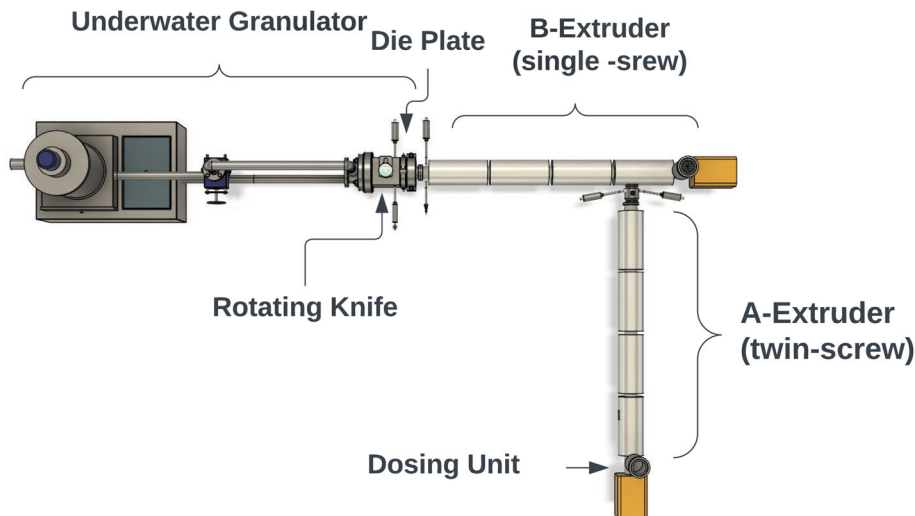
Schematic illustration of a bead foam extrusion machine with an underwater pelletizing unit, showcasing key processing components emphasized for clarity. [Color figure can be viewed at [wileyonlinelibrary.com](http://wileyonlinelibrary.com)]
